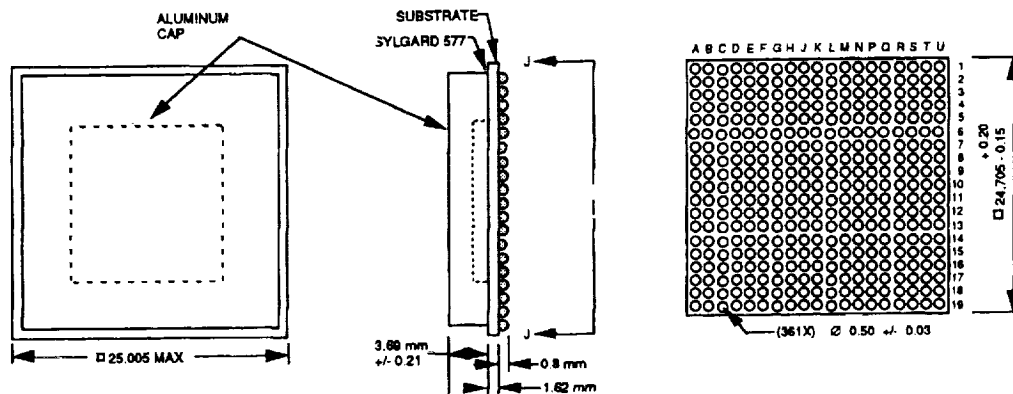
Ceramic Ball-Grid-Array Package shown with connections on 50 mil centers with a) top view, b) side view and c) bottom view illustrating the high number of connections.
